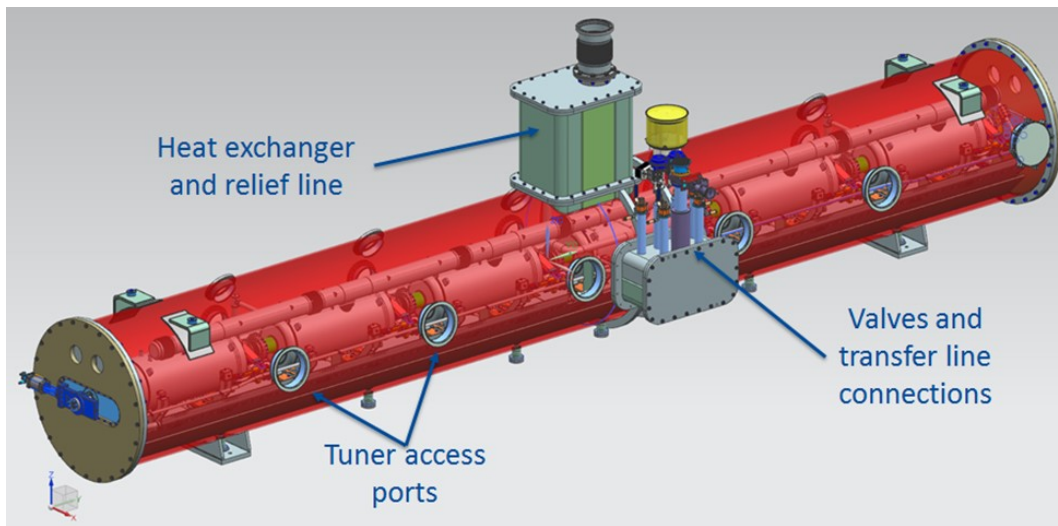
High-beta 650 MHz cryomodule assembly.
